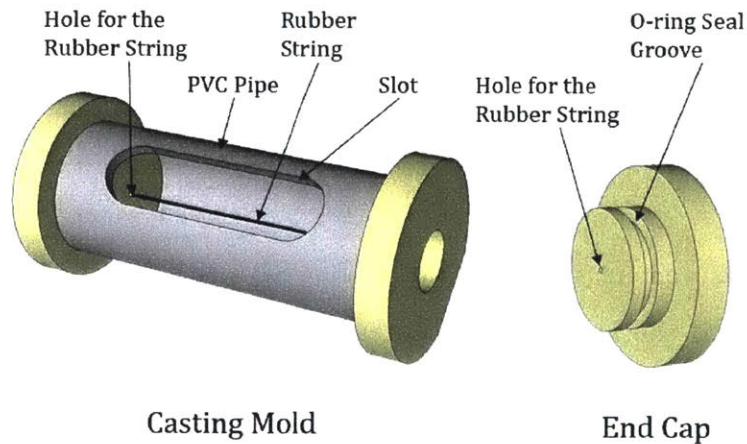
Mold for casting the gypsum specimen with a cylindrical tube.
